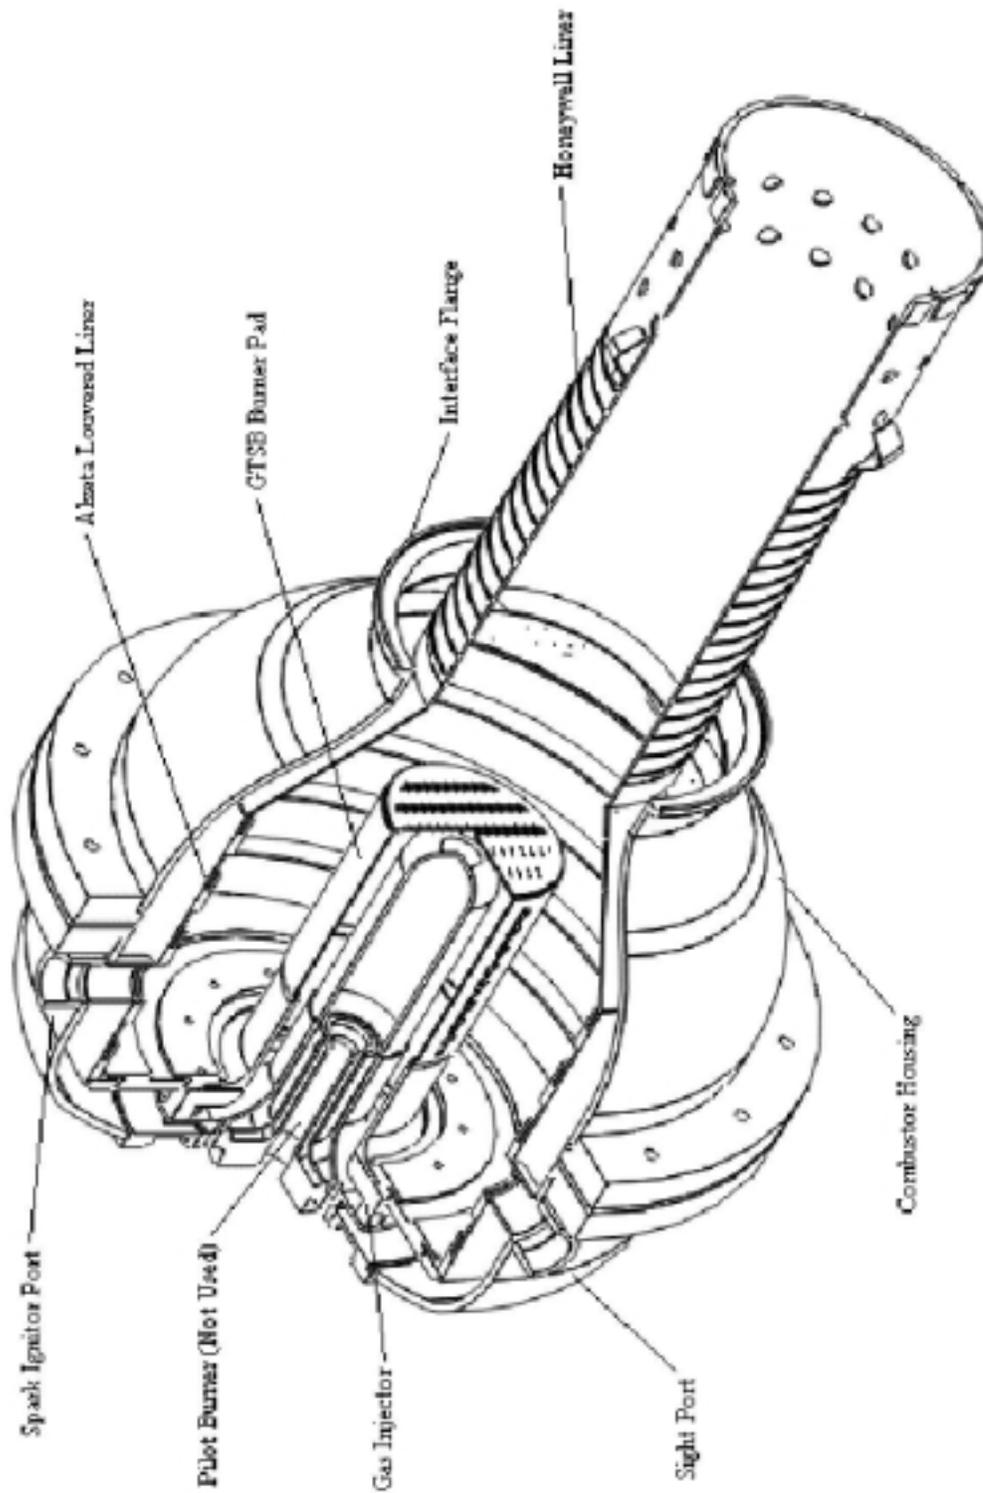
GTSB Combustor For Honeywell Test, Cut-Away View
